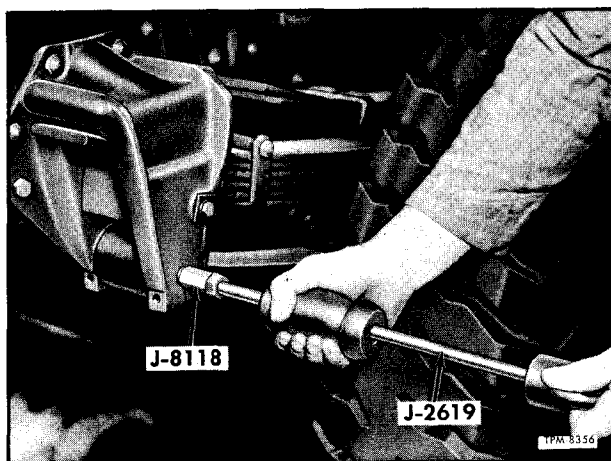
Removing Radius Leaf Pin with Slide Hammer and Adapter
